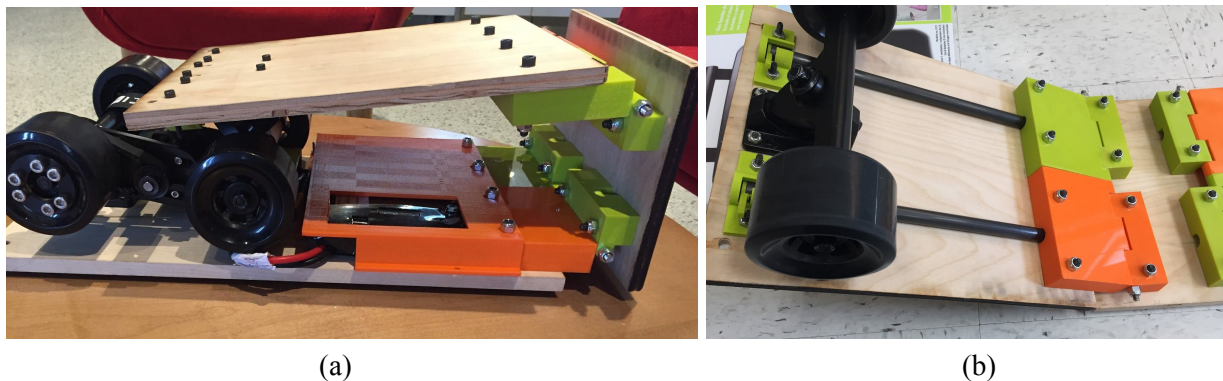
(a) The board in the folded position, (b) View of the structural rod and locking mechanism when board can be folded.
